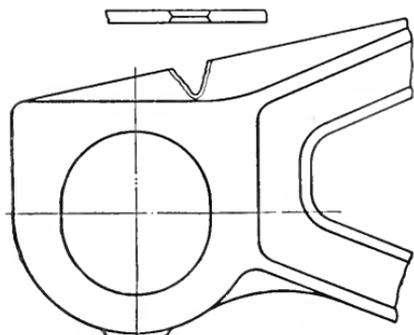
Cracked Cast Steel Side Truck Frame Prepared for Electric Welding
